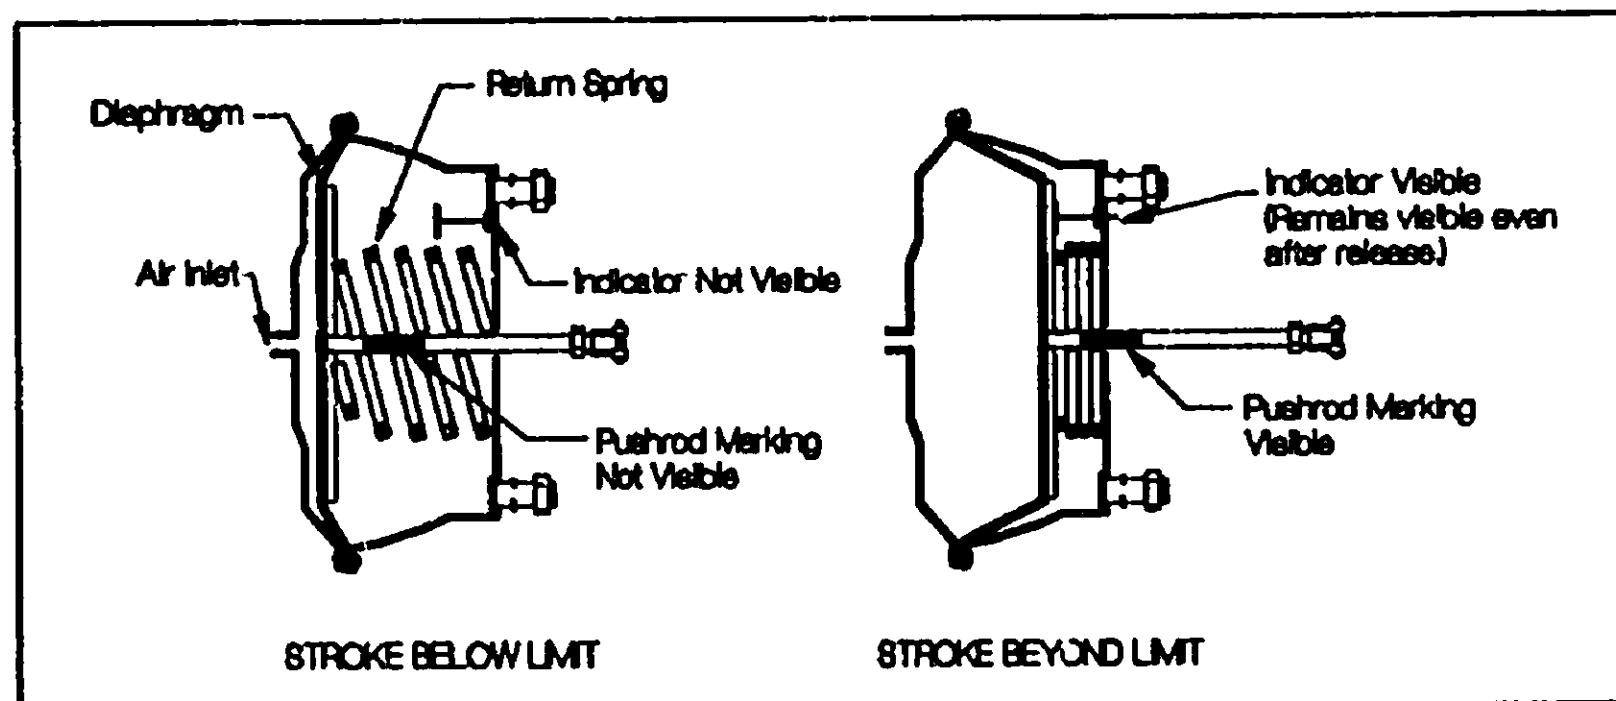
Examples of brake adjustment indicators (pushrod marking/visible indicator).
